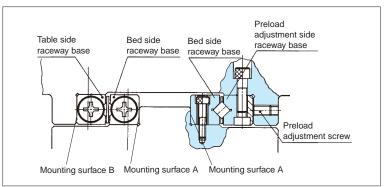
Typical mounting of Cross Roller Way Bearing Unit
